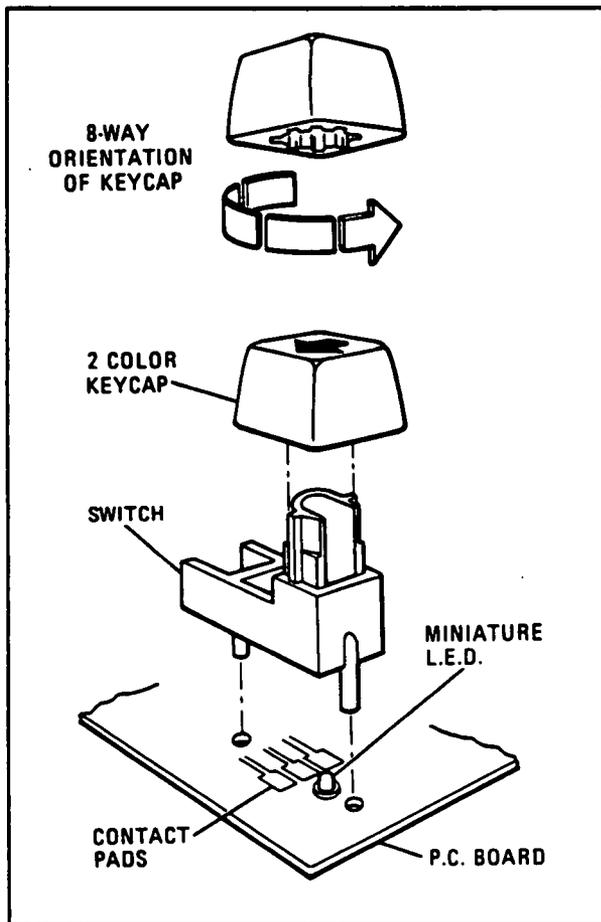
Front-Panel Pushbutton Switch Assembly
